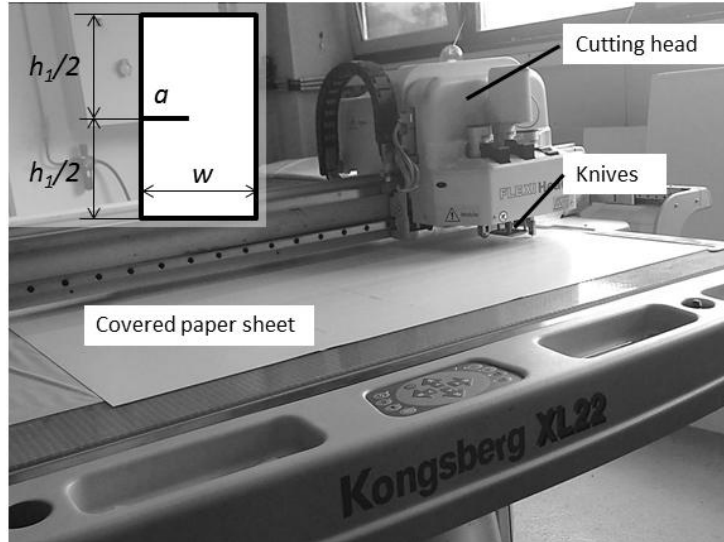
Picture of the cutting machine. In the insert, cutting scheme of paper sample.
